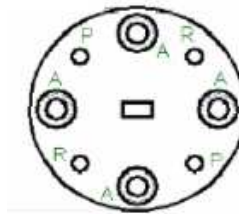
Examples of a standard flange pattern. A is the threaded screw hole, P is where an alignment pin is inserted and R is the receptacle for the pin on the mating piece.
